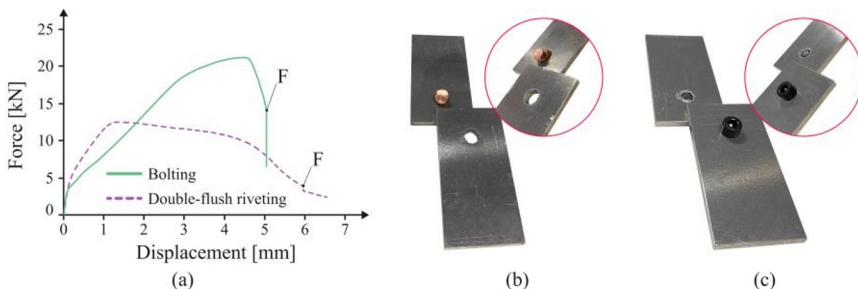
(a) Experimental force-displacement evolution during the static shear destructive tests of the two types of joints with photographs of the (b) double-flush riveted and (c) bolted joints after testing.
